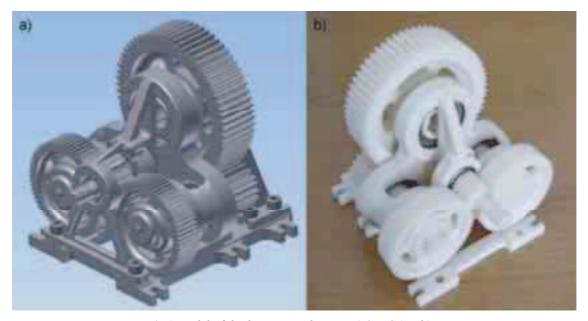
A model of dual-power path gear: a) 3D-CAD, b) FDM
